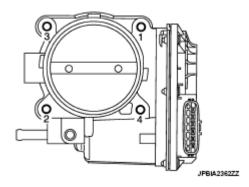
Electric Throttle Control Actuator Mounting Bolts
